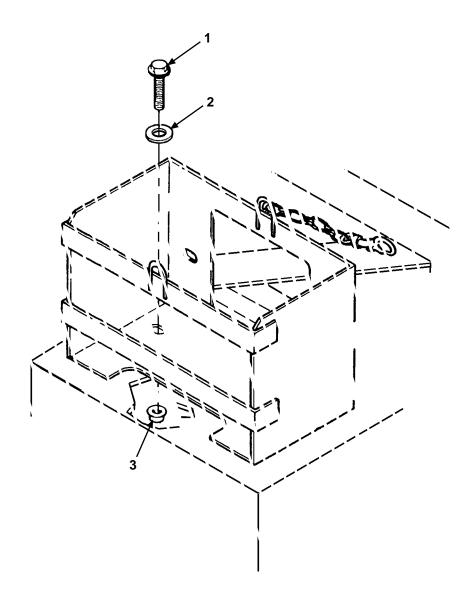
A. Wheel Chock Stowage Box (Model B Only)
